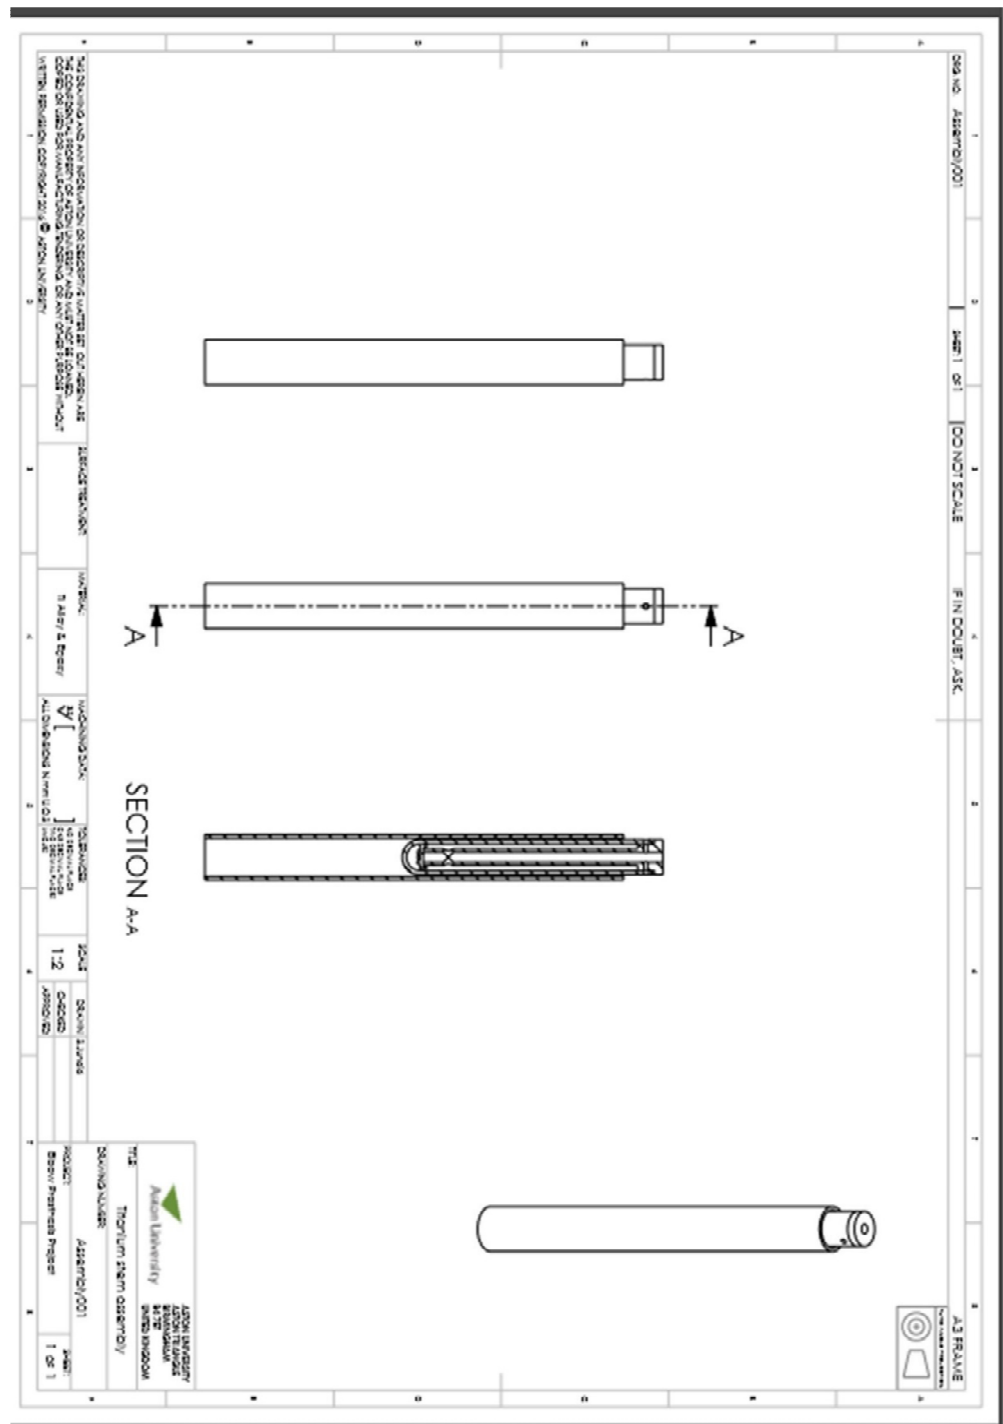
Technical Drawing for the Assembly of Humeral Stem
